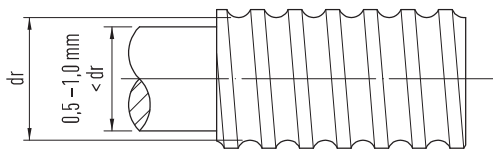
Special requirement of bearing journal with internal recirculation system
